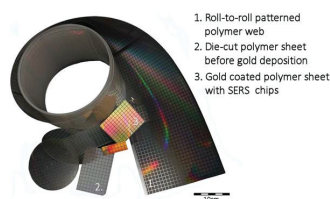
Photograph of roll-to-roll patterned polymer webs and die-cut sheets before and after gold deposition.
